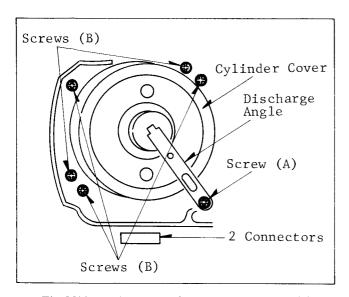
Replacement of D.D. Cylinder Unit-(1)
